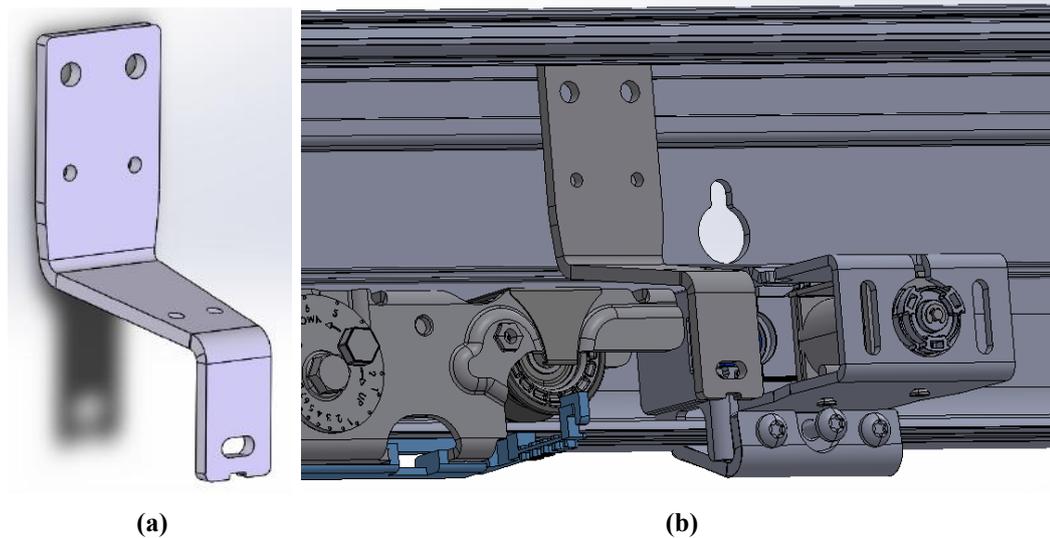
The prototype of the clamp and linear bearing concept mounted on an SL500 sliding door.
